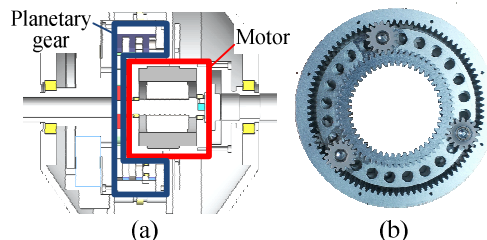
(a) Power transmission of in-wheel motor, and (b) developed planetary gear.
